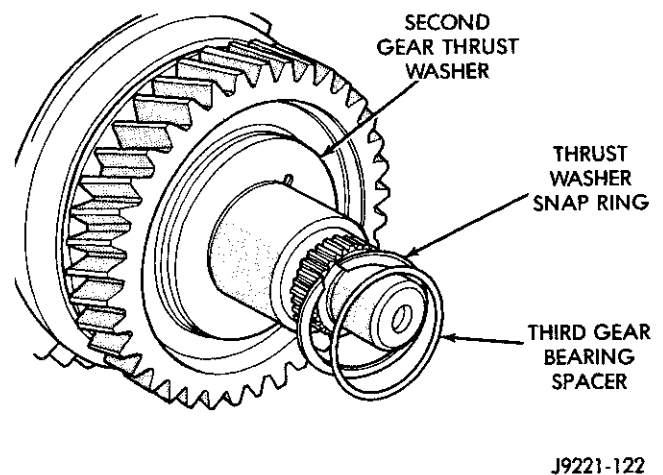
Installing Snap Ring And Third Gear Bearing Spacer
